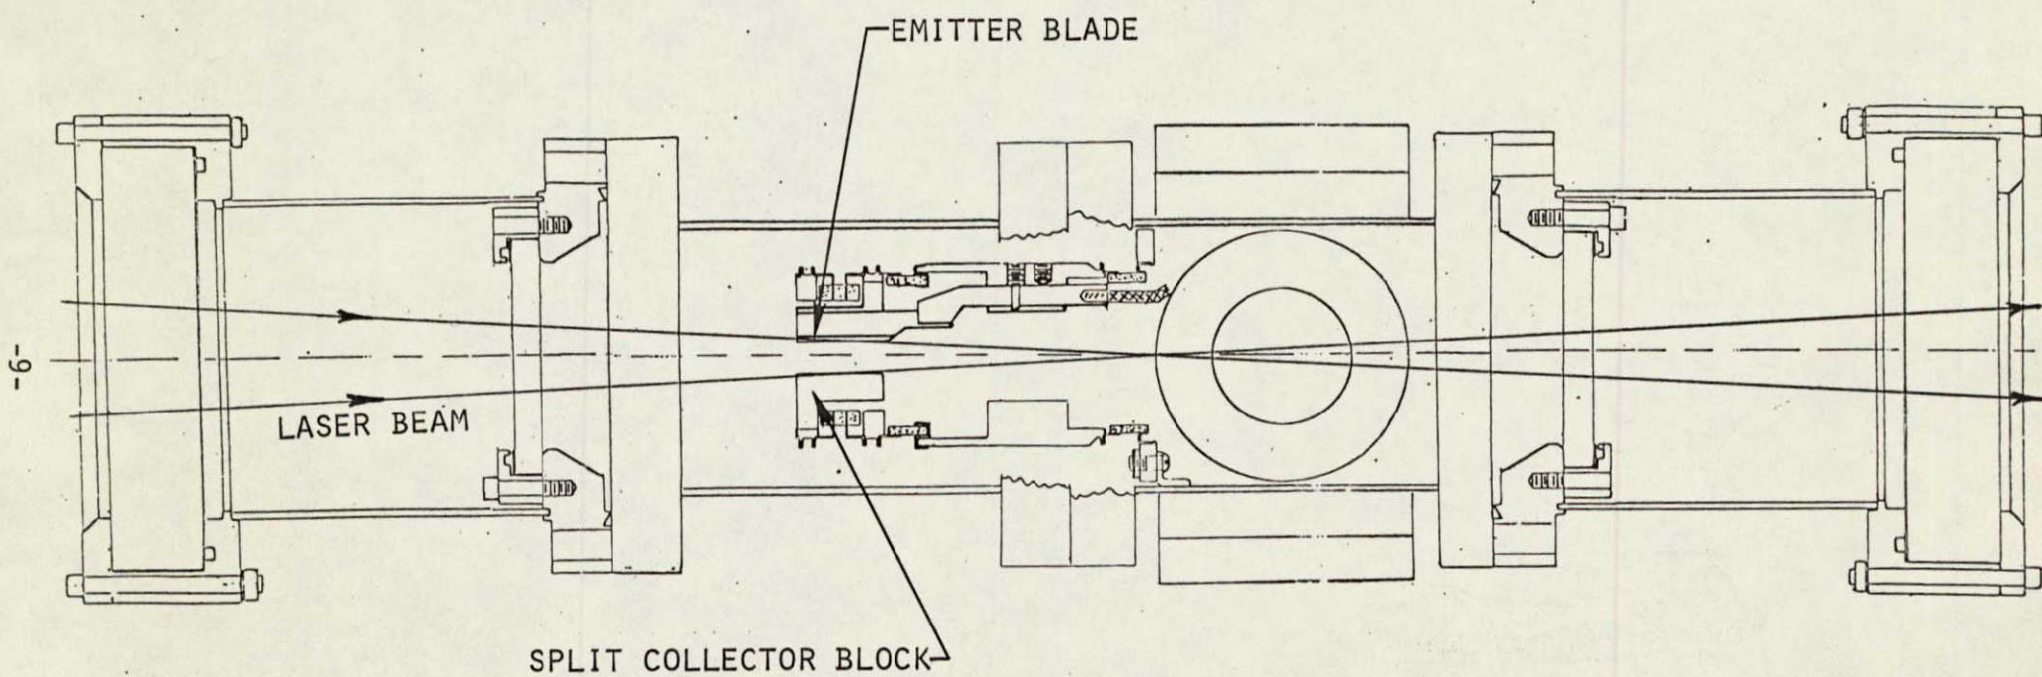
Drawing Showing Location of TELEC Electrodes in Test Chamber
